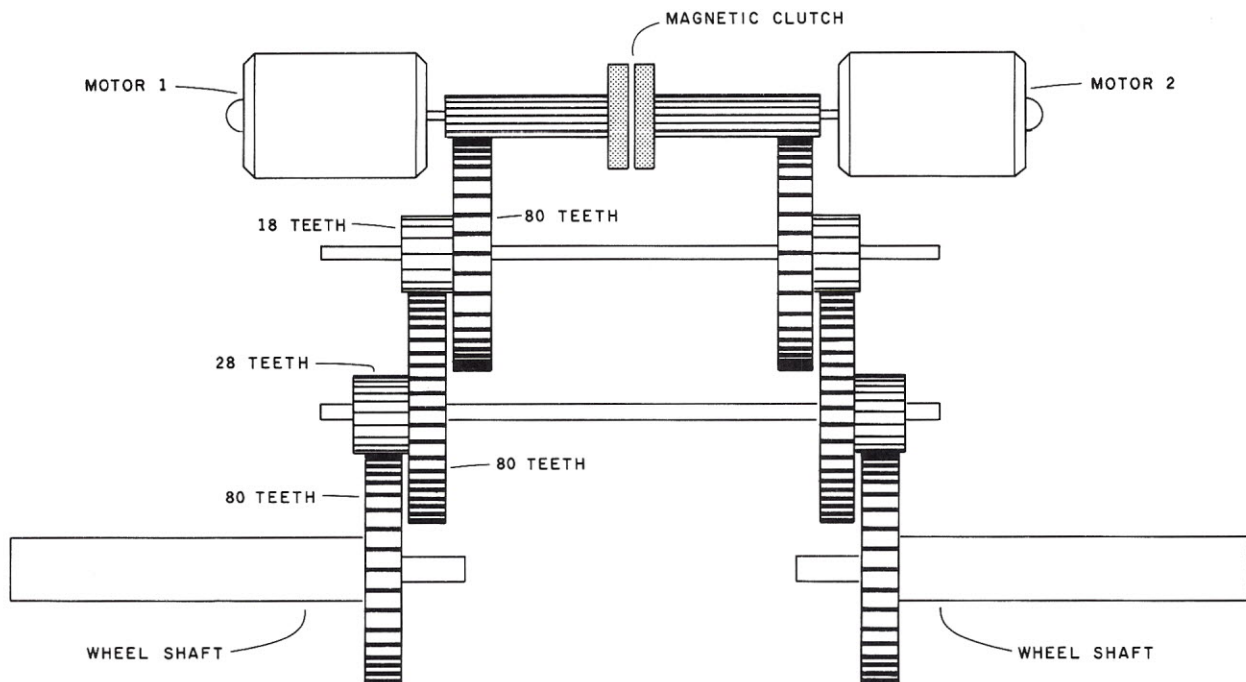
Wheel gearing arrangement of commercially available Big-Trak gear box.
